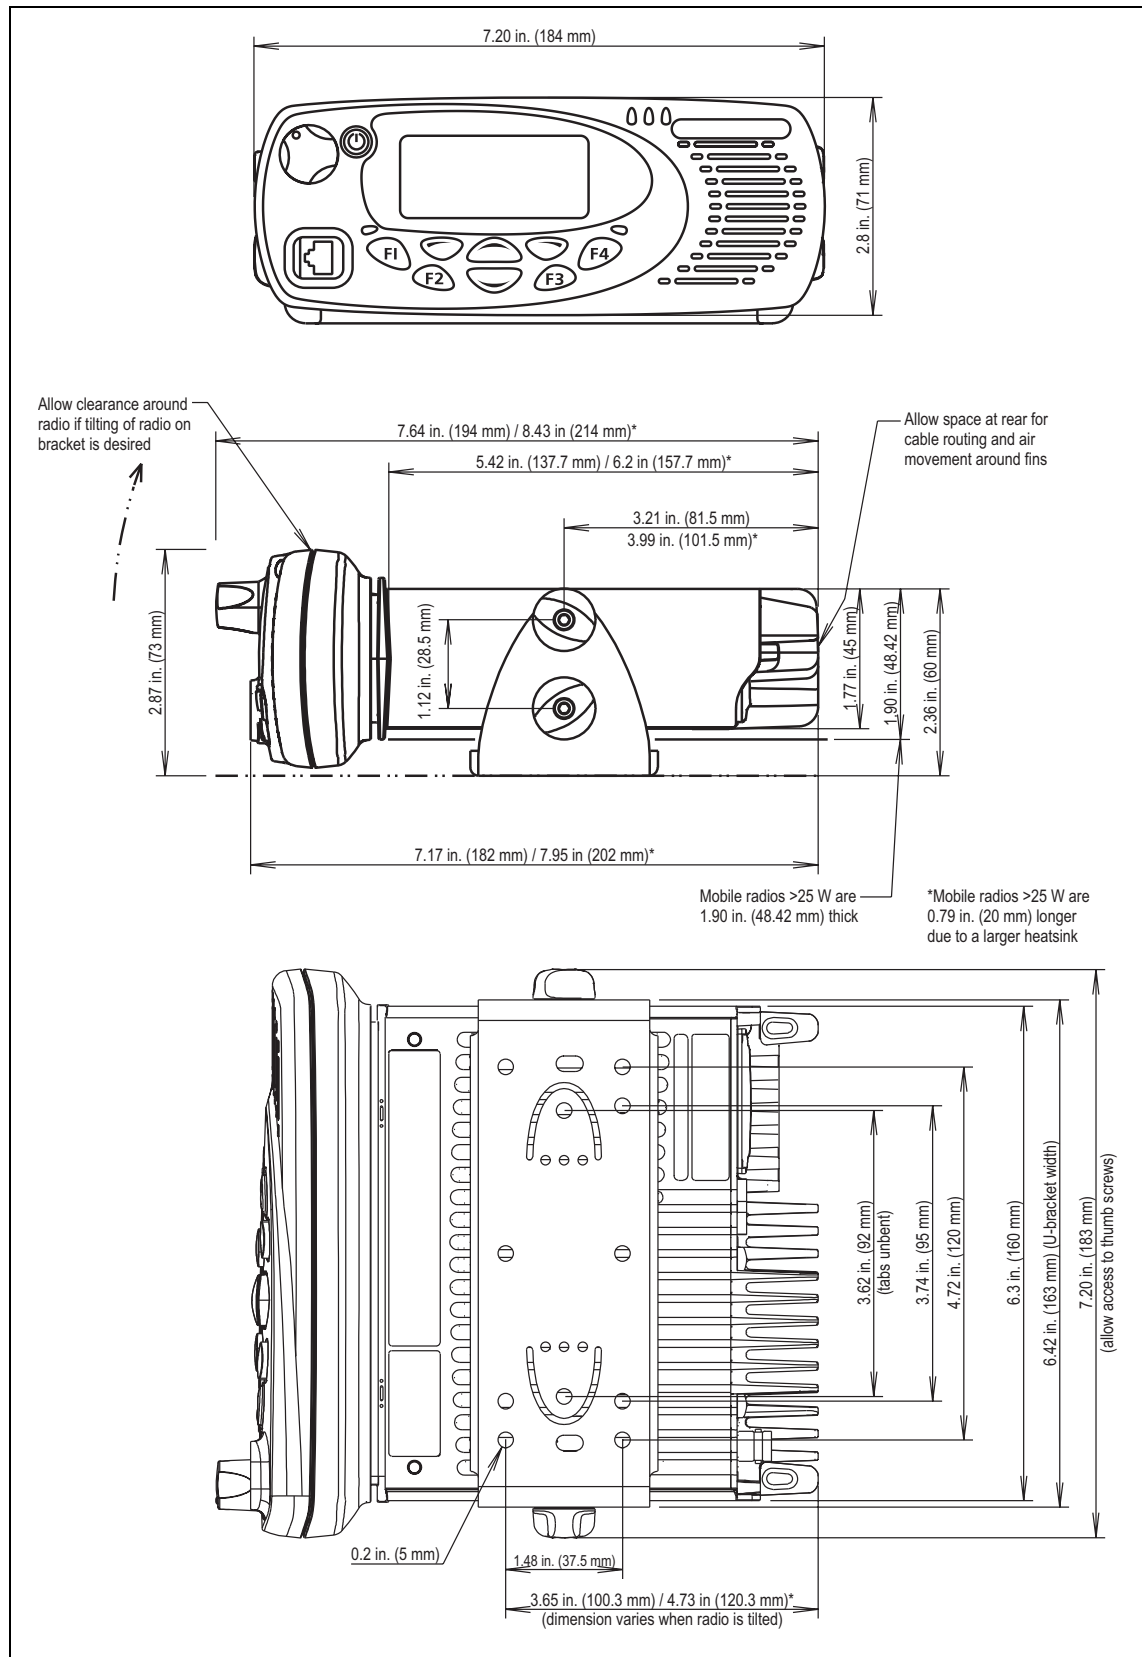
Dimensions of remote control head installation (graphical control head only)
